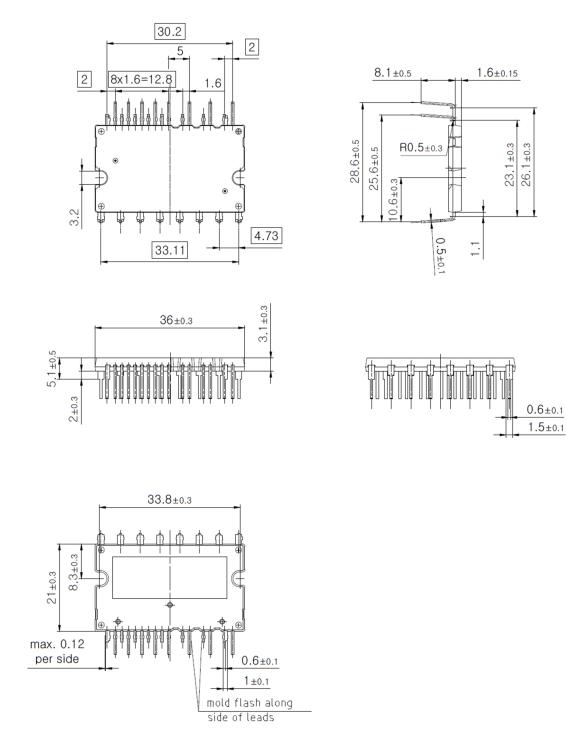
Package outline dimensions of IM564-X6D (unit: [mm])
